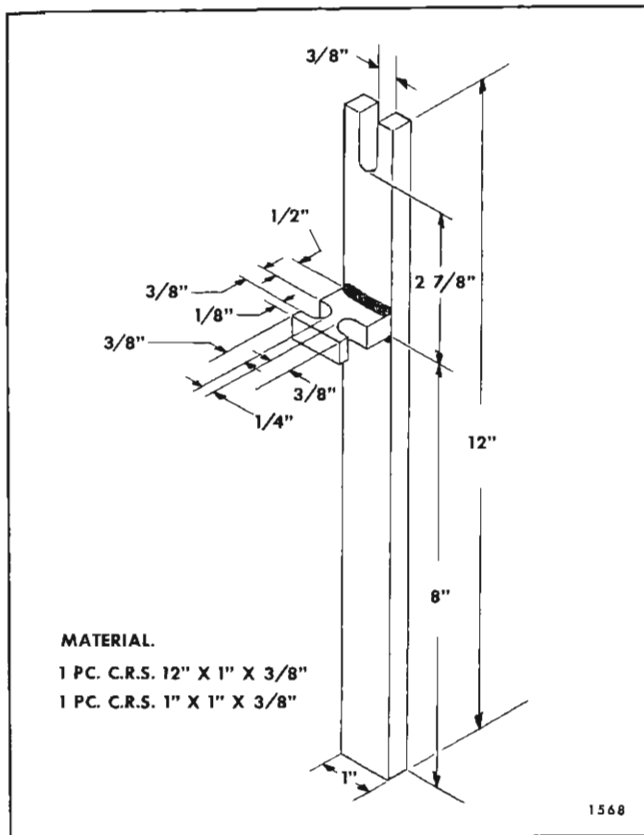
F10—Rear Compartment Torque Rod Adjusting Tool
